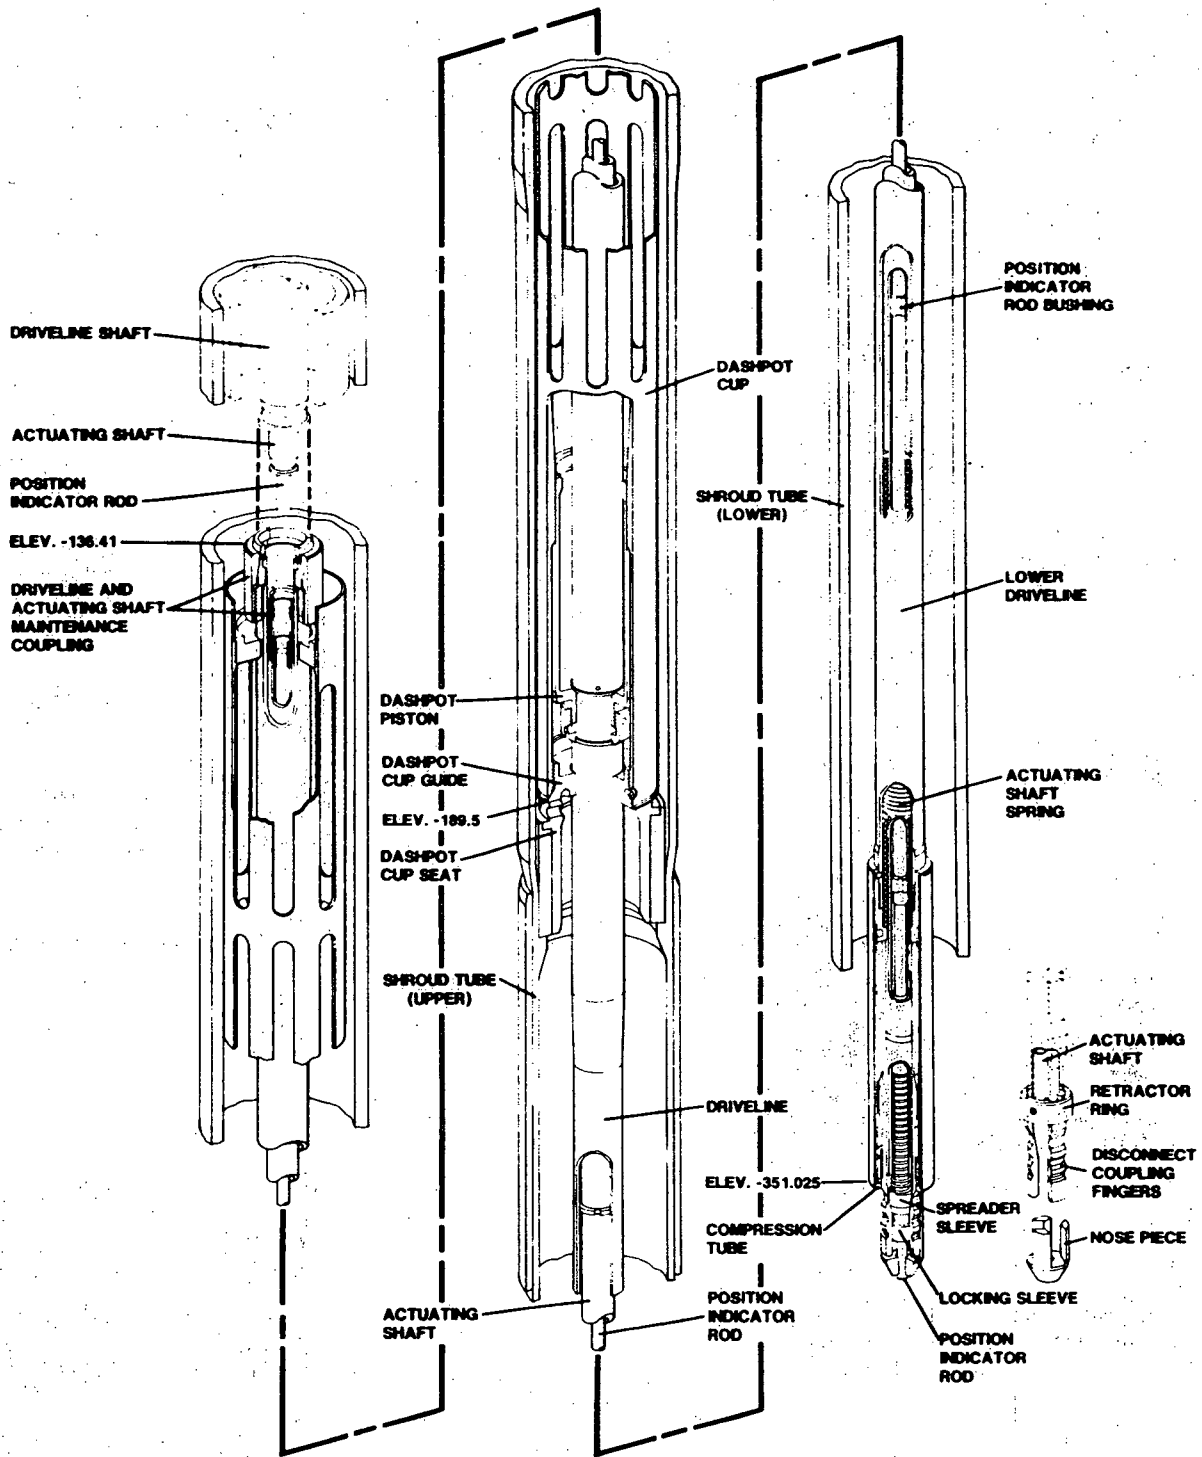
Lower CRD Assembly, Extension Nozzle and Lower Shroud Tube
